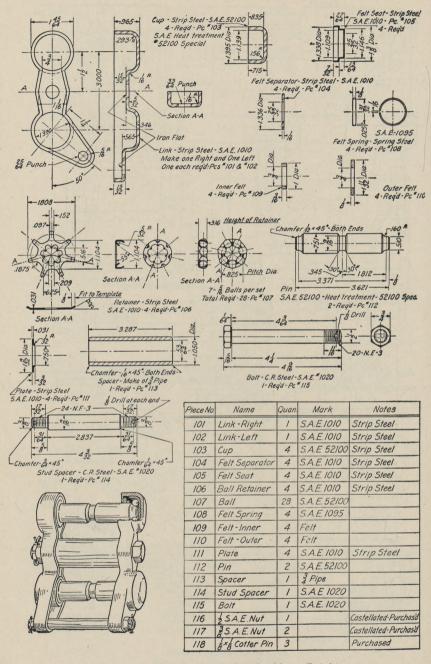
Ball-bearing spring shackle. (Fafnir).
